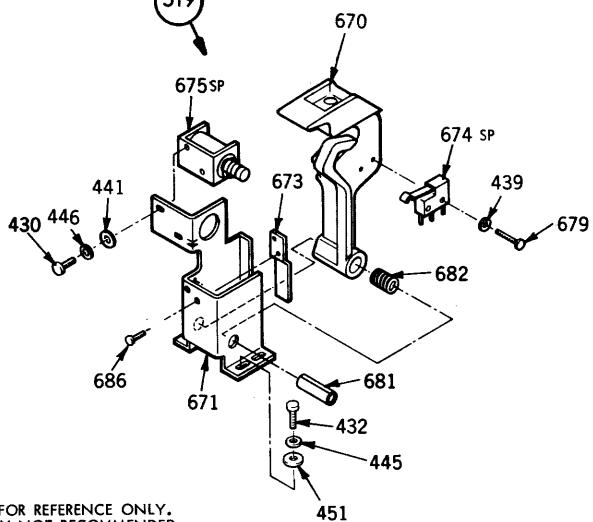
COMMON PARTS SUB ASSEMBLIES (SHEET 1 OF 2)
